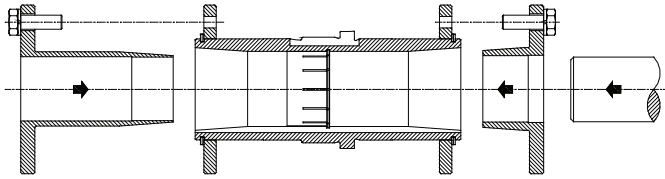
Short Shaft Bushing and Output Hub Assembly
